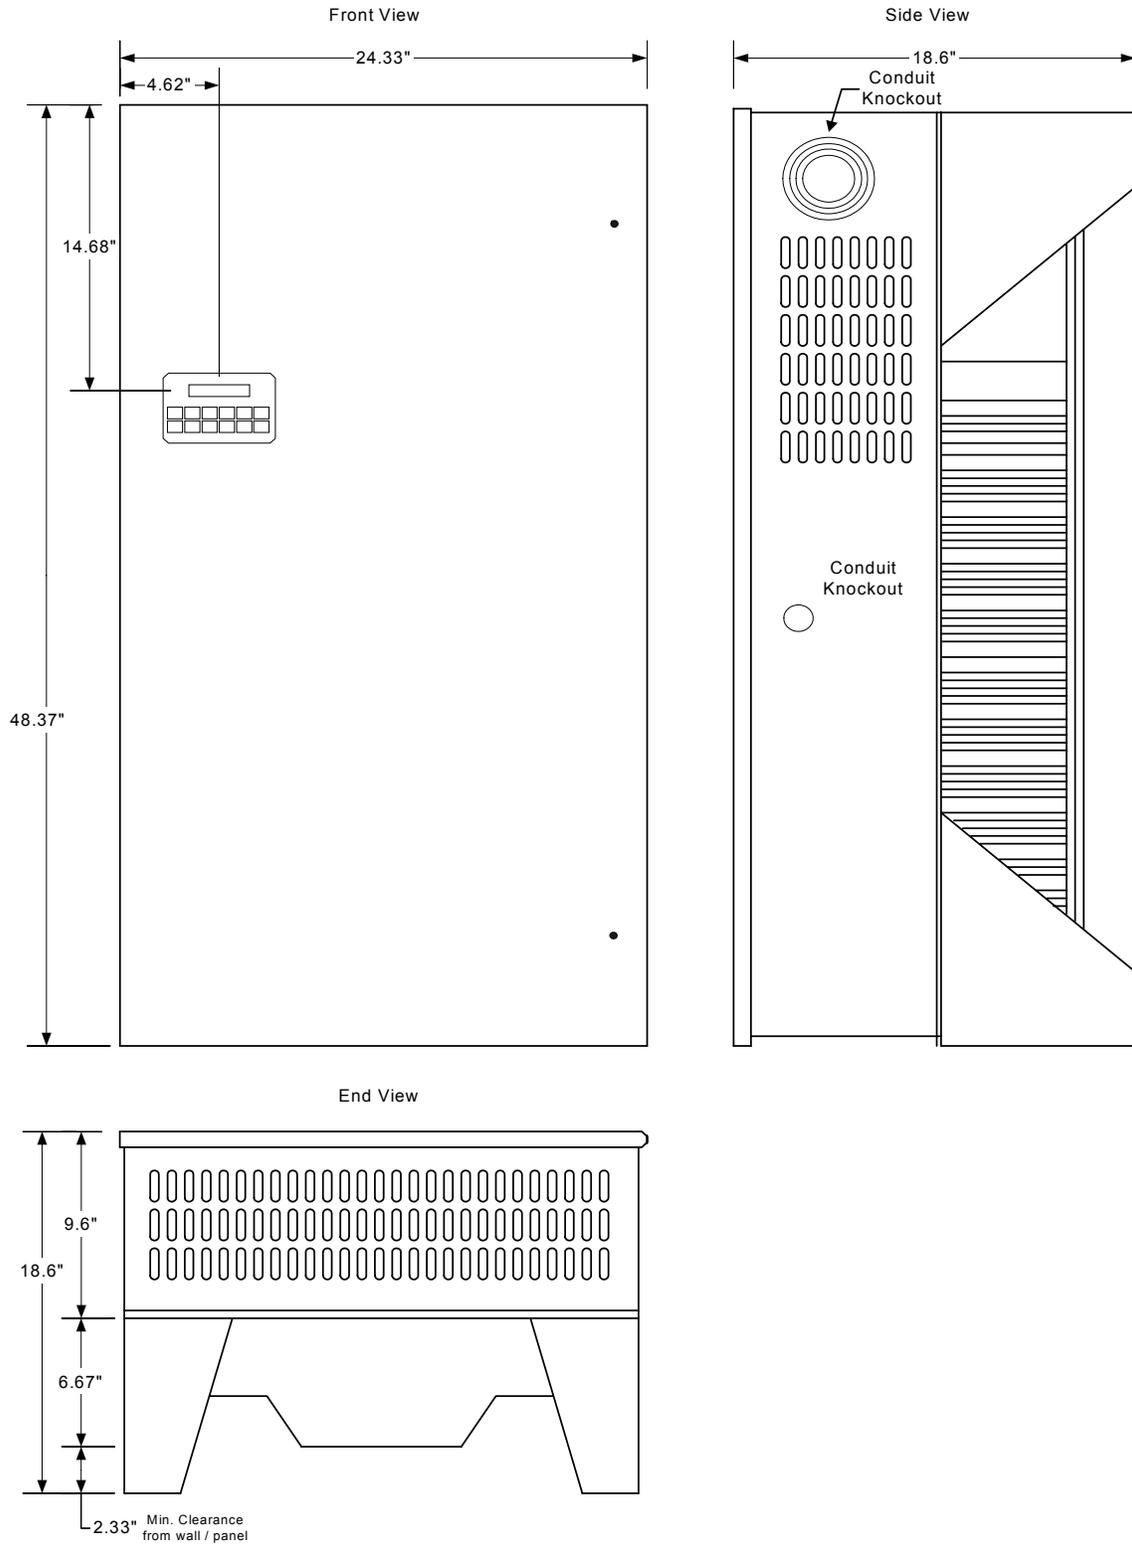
B - SV3000 DIMENSIONS FOR 150-350HP/460VAC – REFER TO PAGE 6
